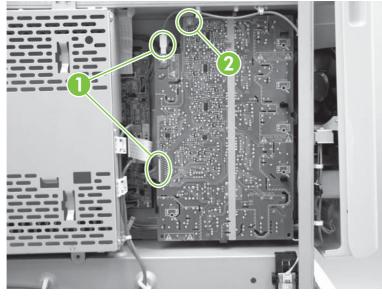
Remove the print-cartridge driver PCA (3 of 3)
